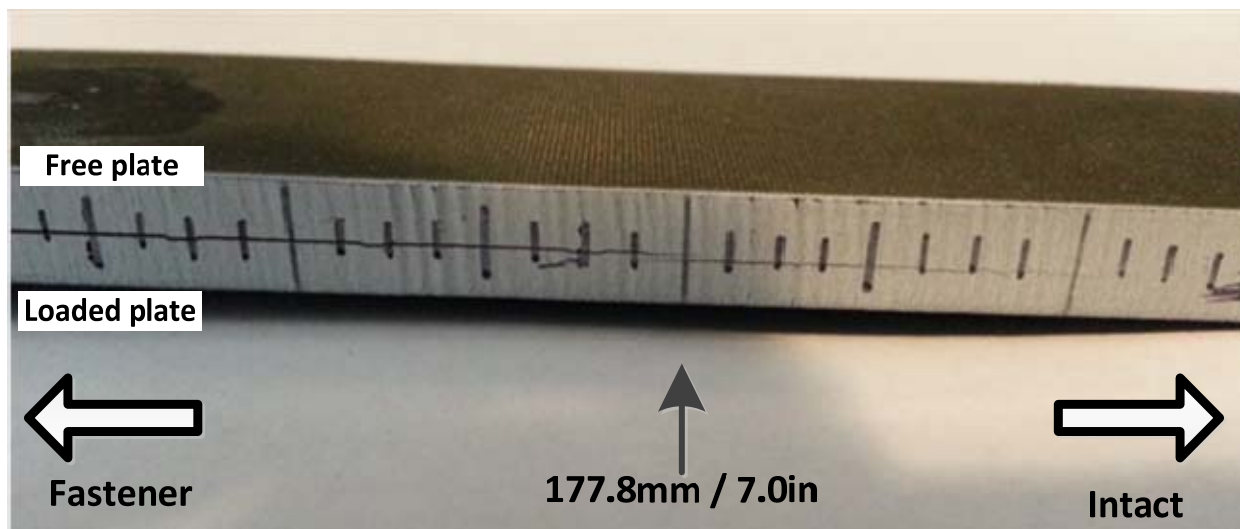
Photo of Specimen Showing Crack Interface Migration during Propagation
